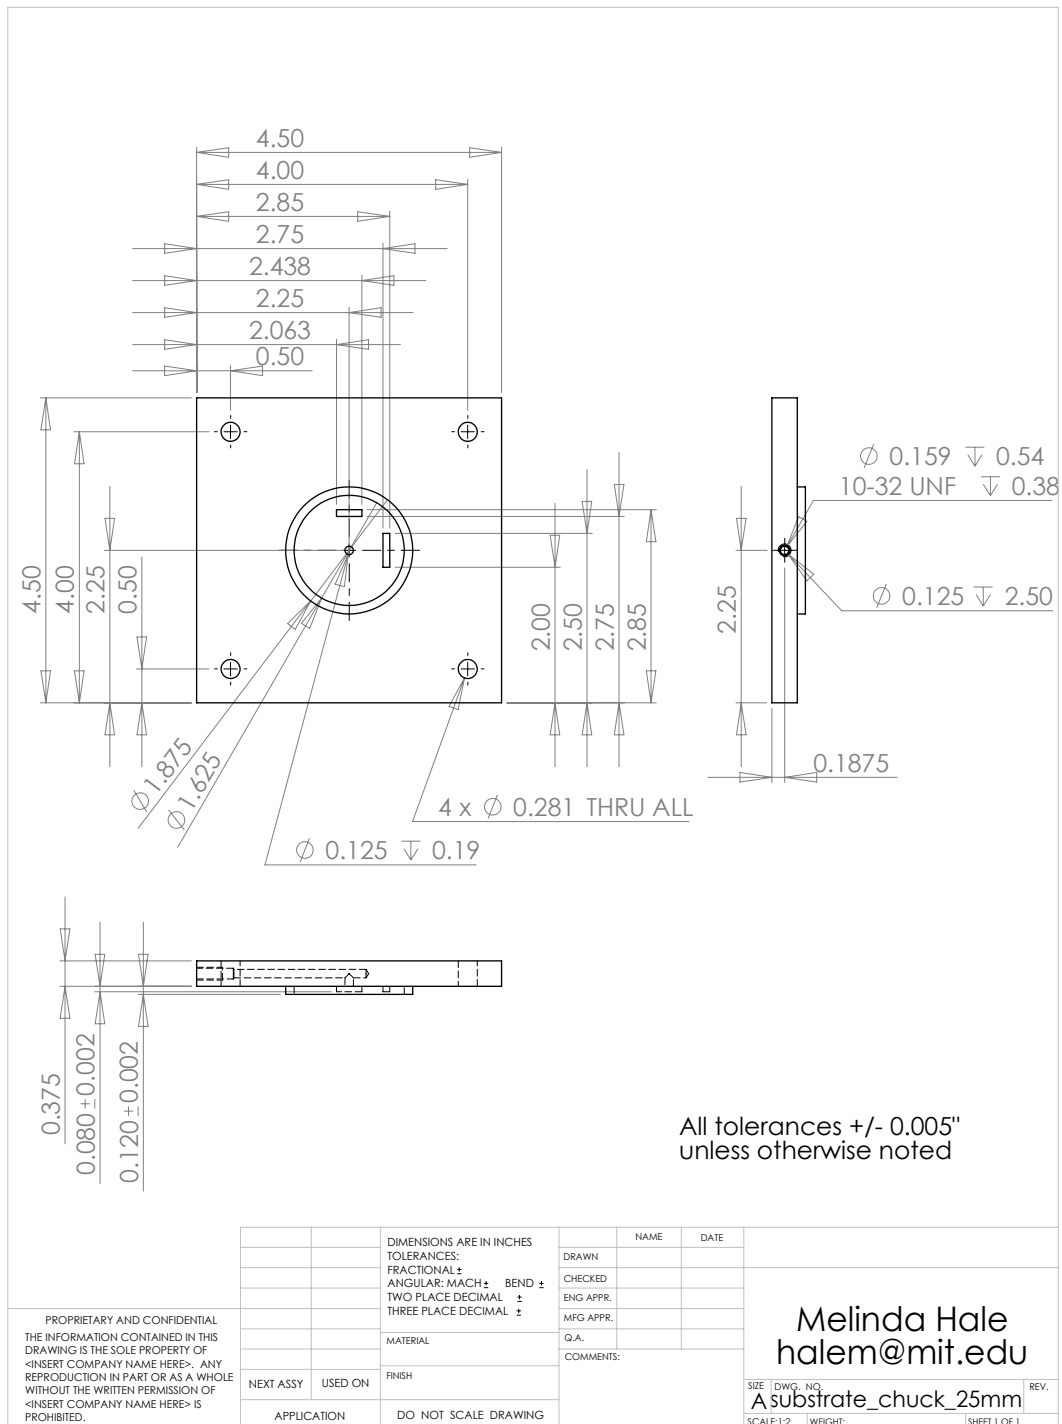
Detailed drawing of 1x1" slide holder, part of substrate chuck assembly
